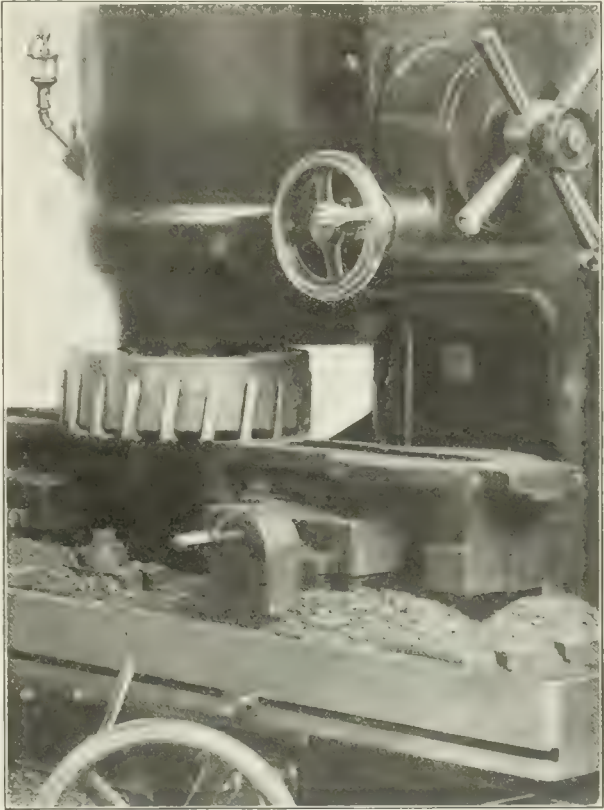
A High Power Face Mill Roughing Vise Body Bottoms, One Piece Being Chucked While the Other Is Being Operated On.
